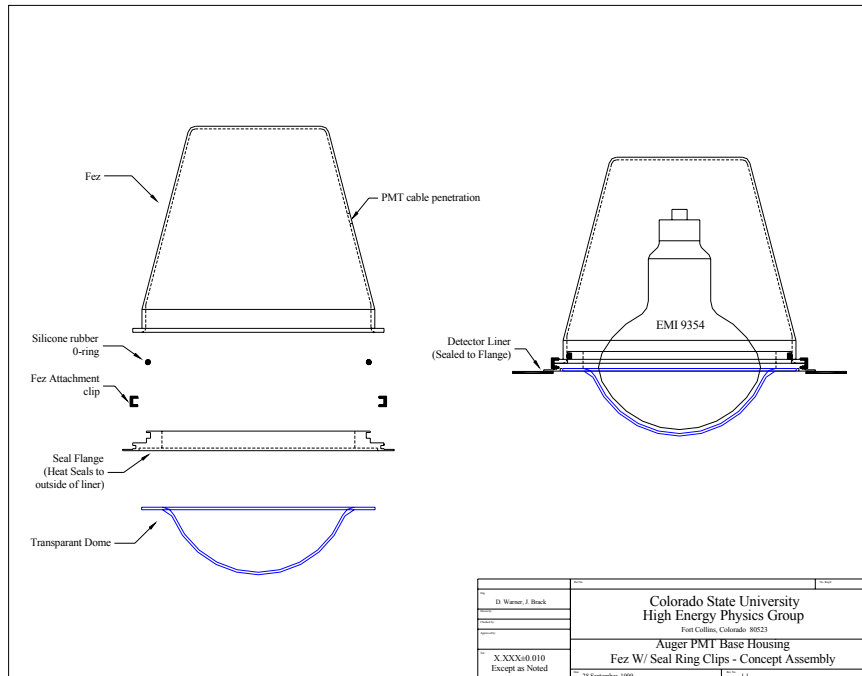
PMT assembly drawing showing the o-ring option for fez-flange seal.
